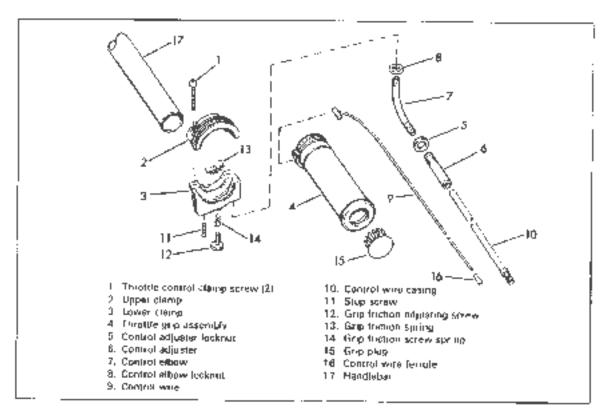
Handlebar Control (Drum Type) - Exploded View
